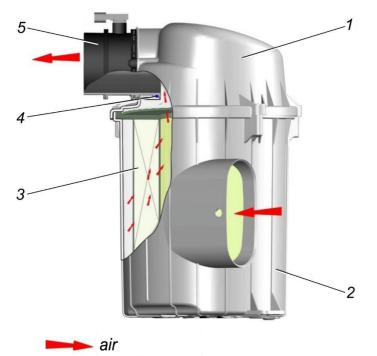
Air filter assembly with insert: 1 – upper housing part; 2 – lower housing part; 3 – filter element; 4 – sealing ring; 5 – insert with sensor
